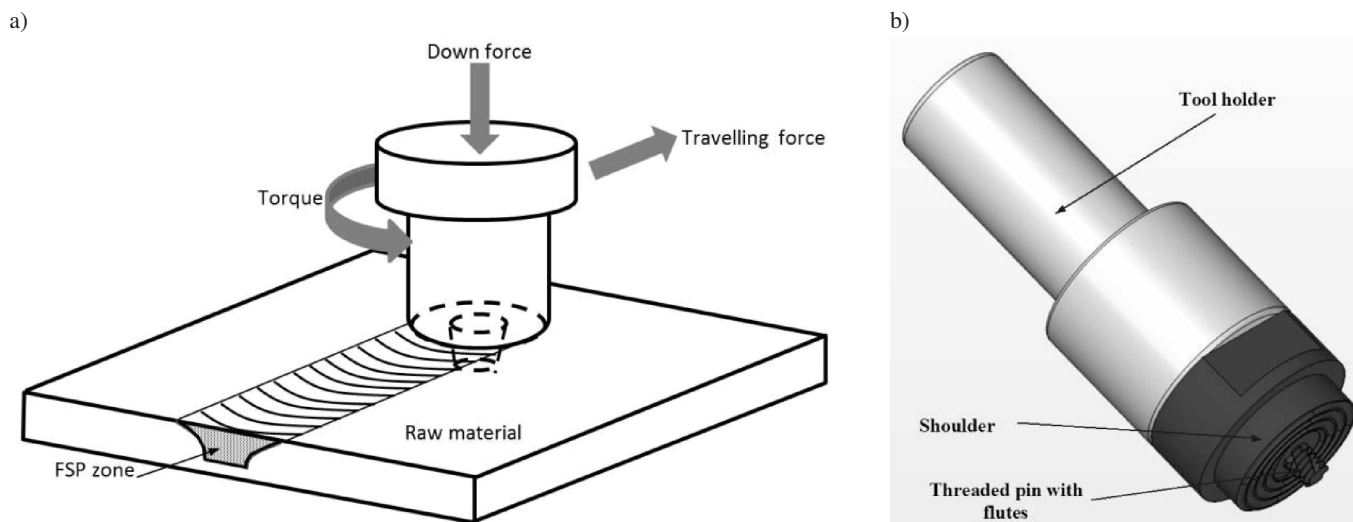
Schematic drawing of a) friction stir processing process and b) tool
